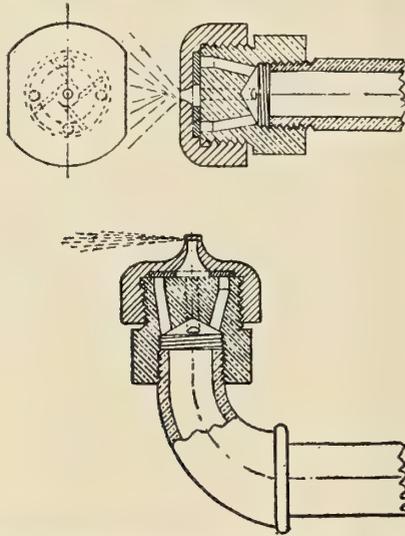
PEABODY FLAT SPRAY MECHANICAL ATOMIZER
